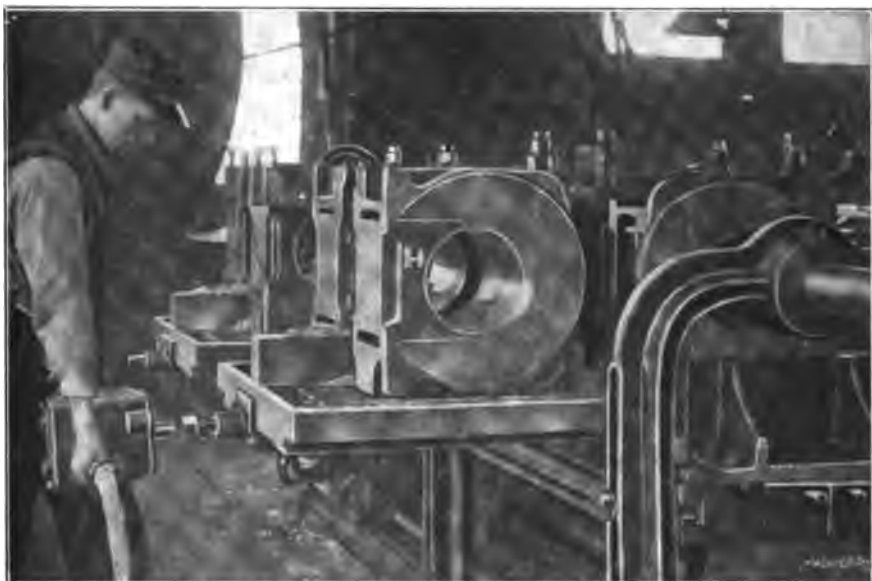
The Last Operation. Finishing the Bearings on the Boring Machine.
